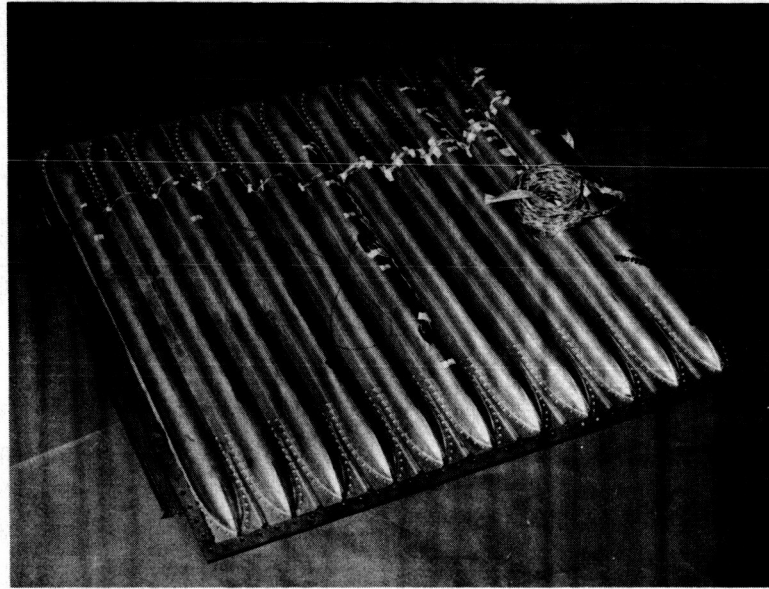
COMPRESSION PANELS—FLUTED SINGLE SHEET—LOW LOAD
